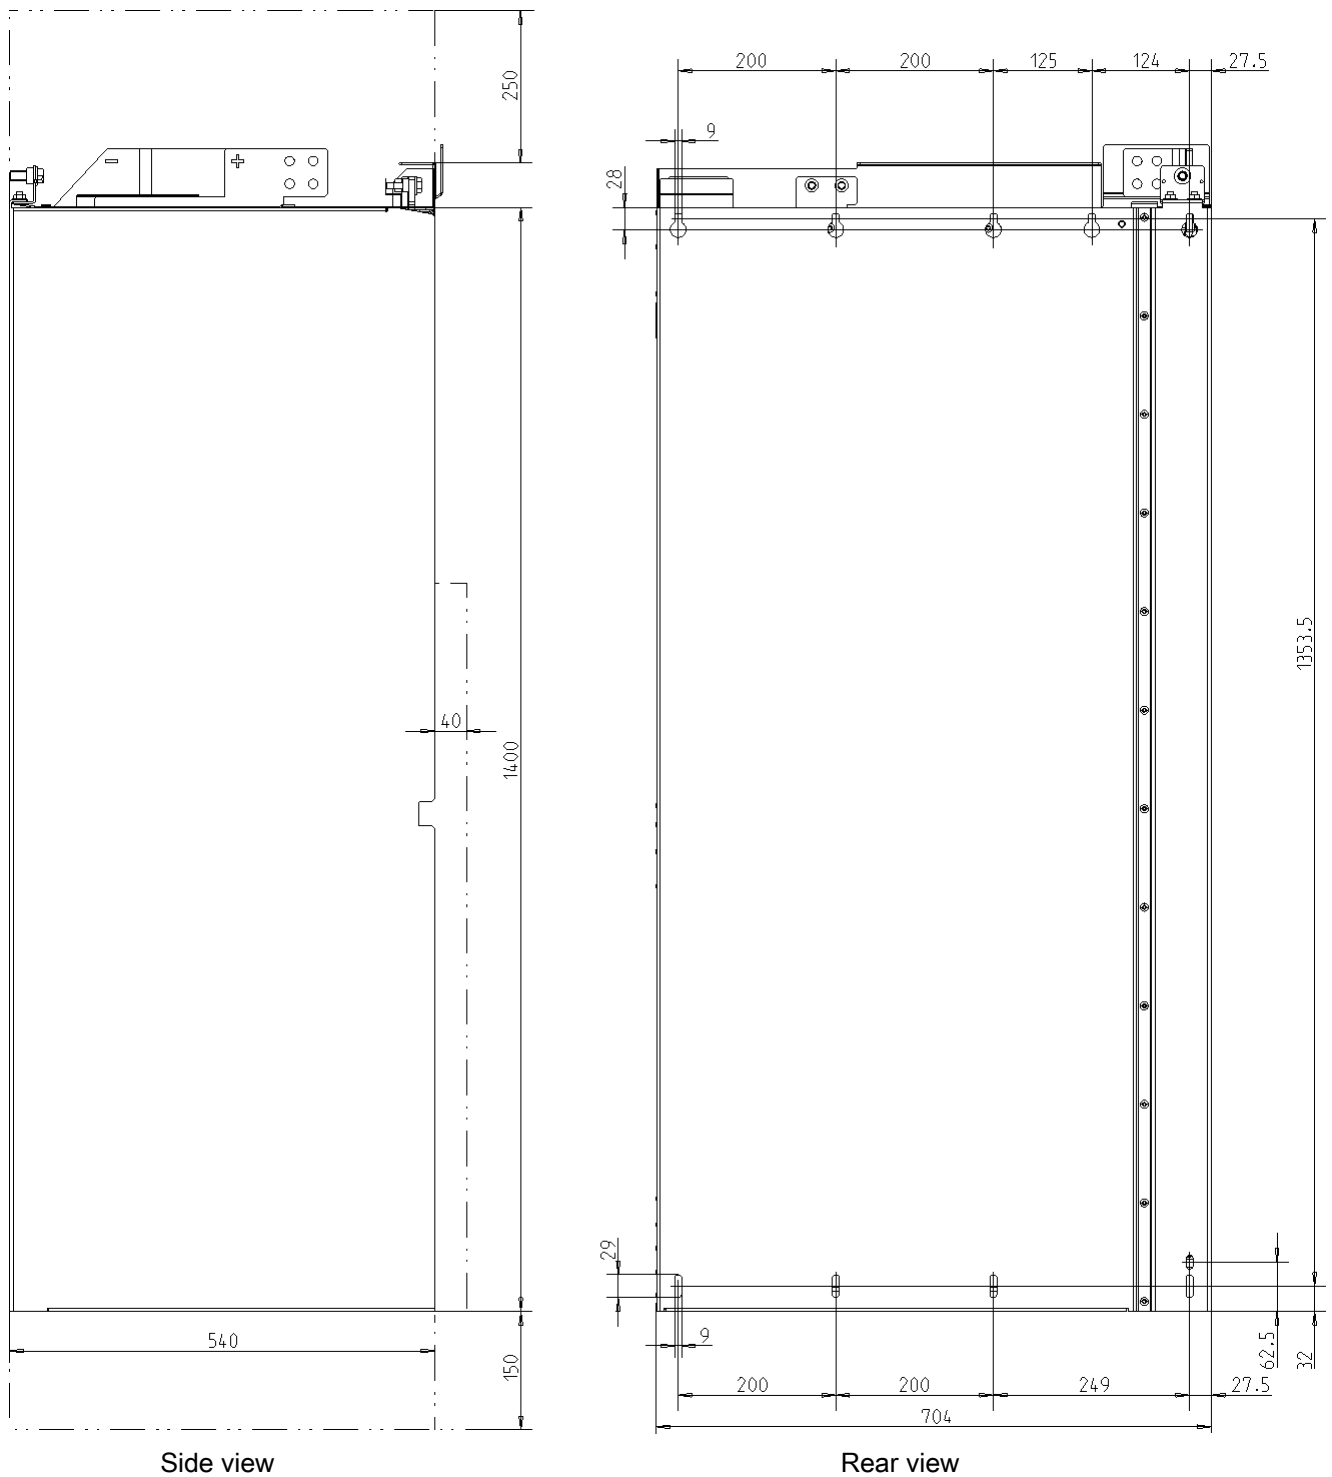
Dimension drawing of Motor Module (type JX)
